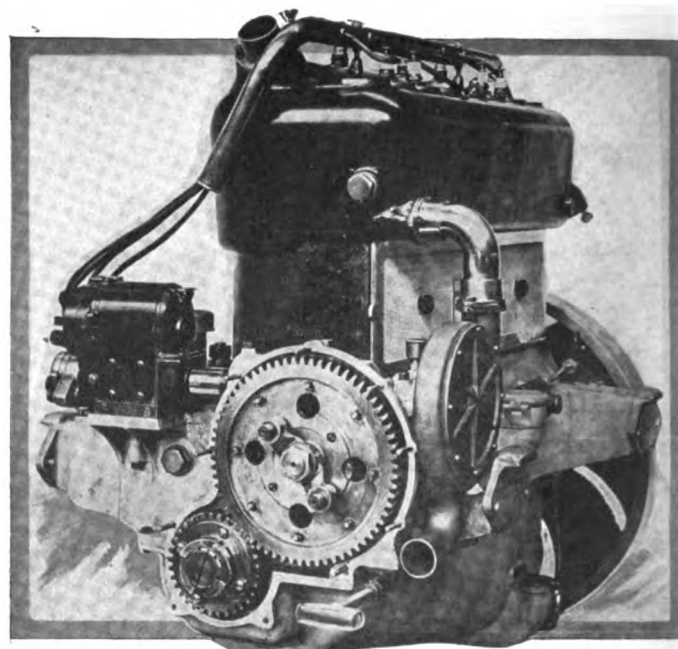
Timing gears and magneto mounting of the new Fiat motor
